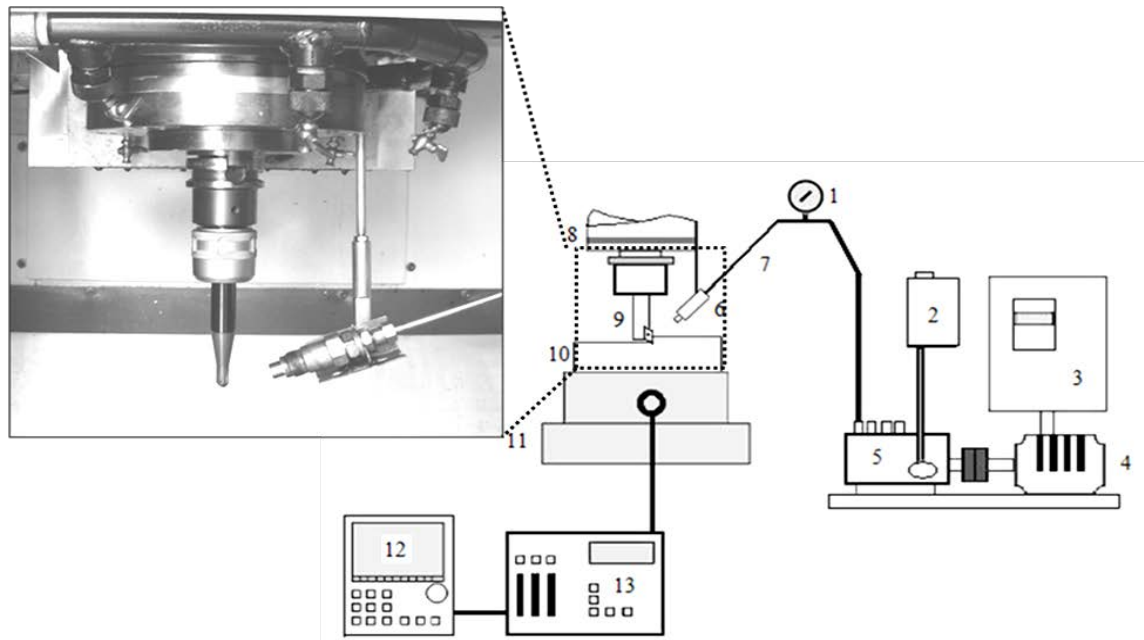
Schematic diagram of pulsed jet MQL system: 1- pressure gauge; 2- fluid tank; 3- variable speed control drive; 4- electric motor; 5- injection pump; 6- nozzle; 7- steel pipe; 8- spindle; 9- insert tool holder; 10- workpiece; 11- dynamometer 12-charge amplifier;,13-oscilloscope
